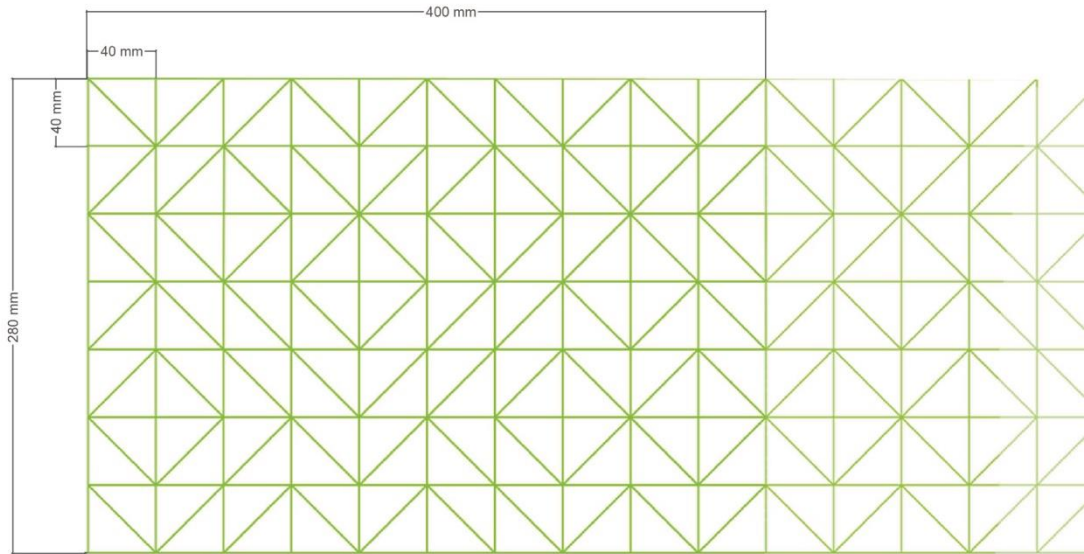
Piezoelectric floor tiles technical drawing dimensions.
